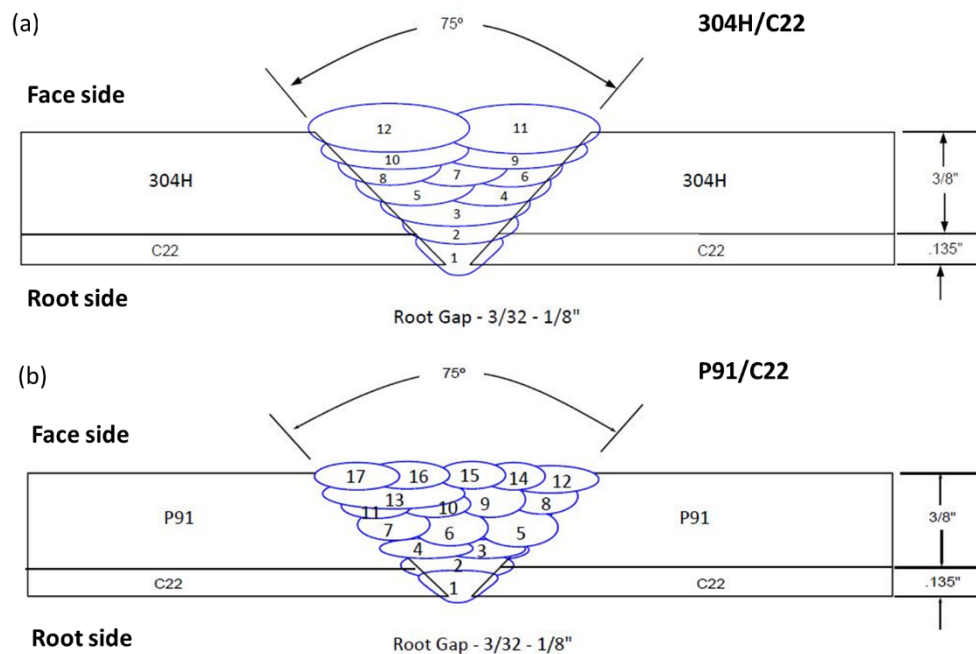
Circumferential butt GTAW of steel pipe clad by C-22 on the ID with a single-V geometry using (a) 304H SS and (b) P91 backer on the face side
